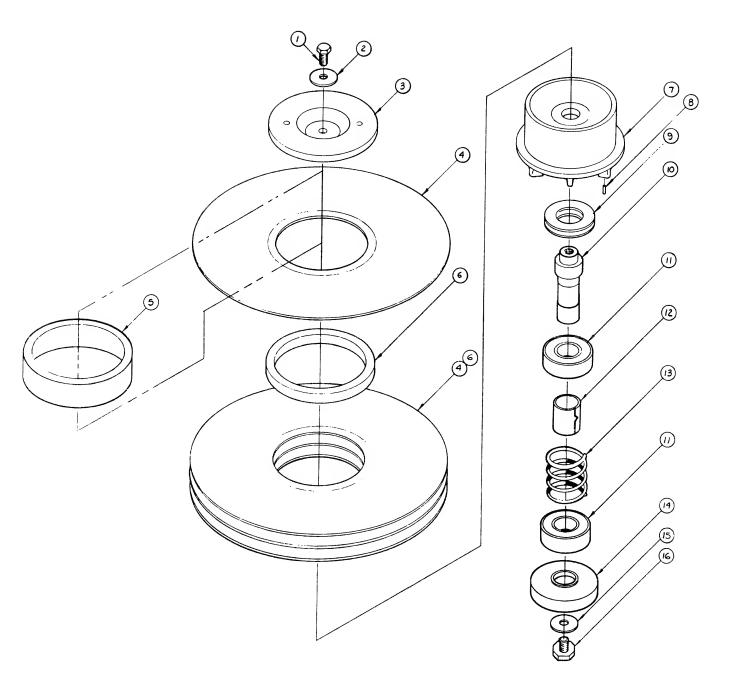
SPINDLE and DISK SUB ASSEMBLY
